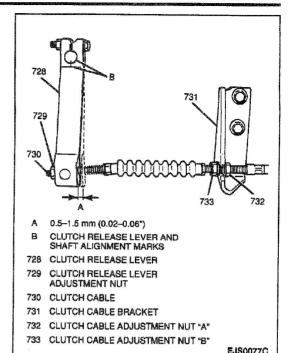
Adjusting Clutch Pedal and Clutch Release Lever Free Travel
